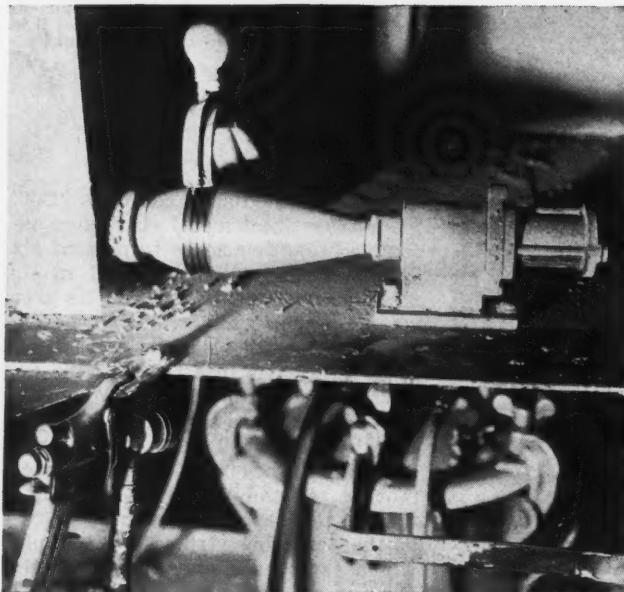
With the Bourrelet Covered with a Guard, Each Shell is Sprayed with Lacquer on the Outside and Acid-Proof Paint on the Inside
